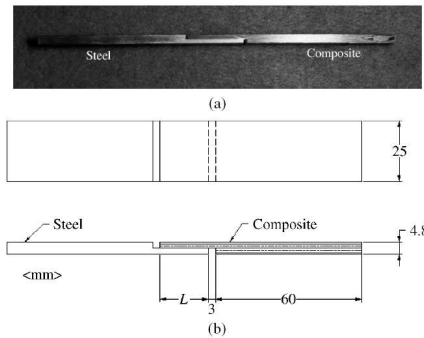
A co-cured single lap joint specimen. (a) Photograph; (b) shape and dimensions
